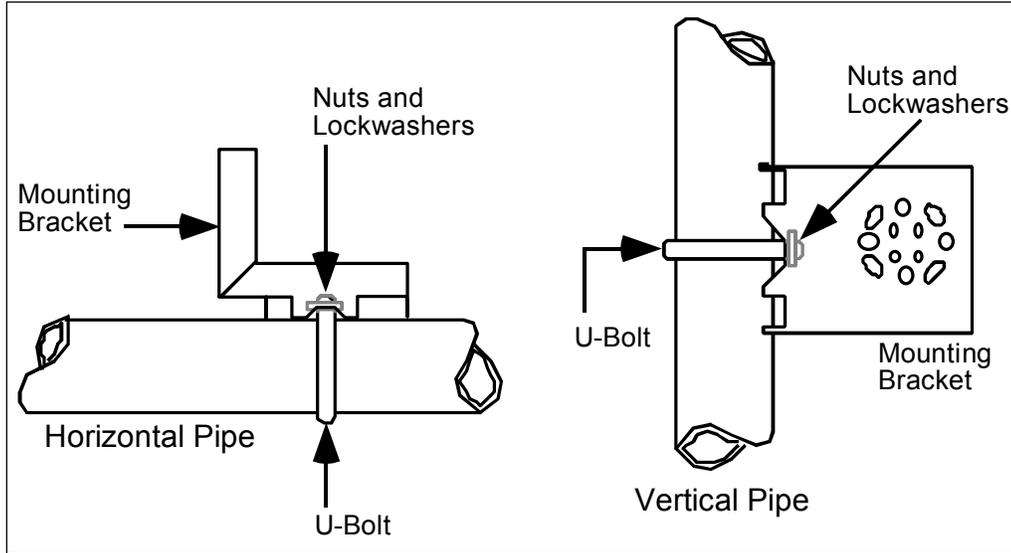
Angle Mounting Bracket Secured to a Horizontal or Vertical Pipe
